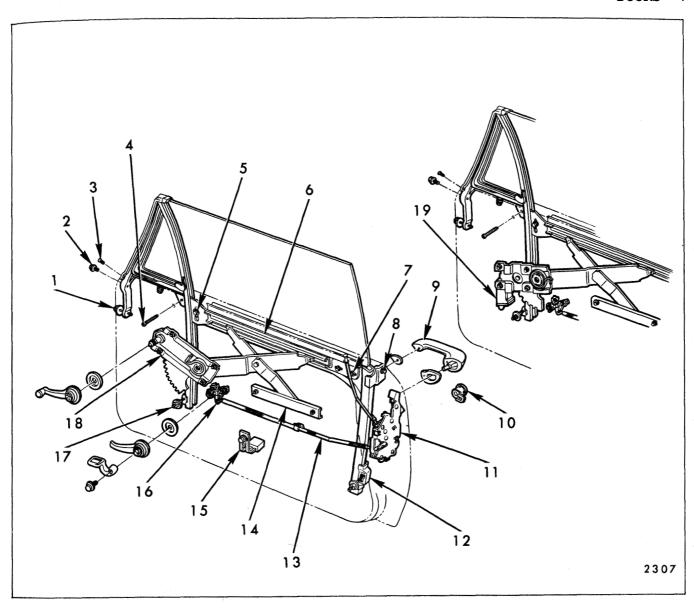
Front Door Hardware - "A-17 and 67" Styles
